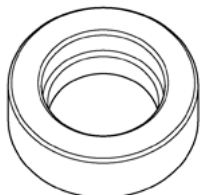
W936589011400 – Rear Crankshaft Seal Spacer
